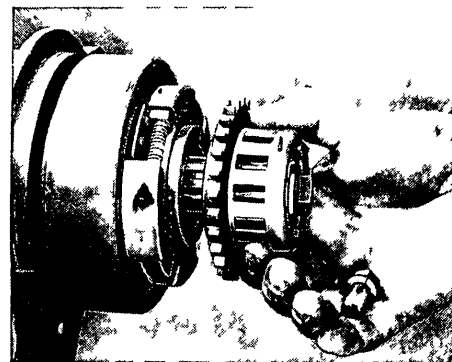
After removing cap screws, take out free wheel cam and hub bushing. Upon reinstallation, tongue of special washer must be installed toward cam. (In some applications, needle bearings are used instead of bushing.)
